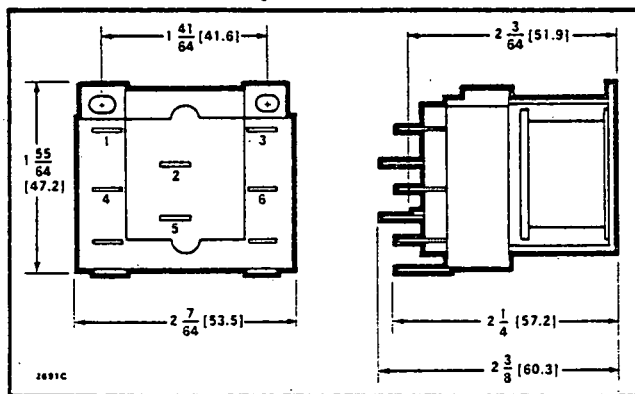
RELAY DIMENSIONS IN INCHES [MILLI-METRES IN BRACKETS].
